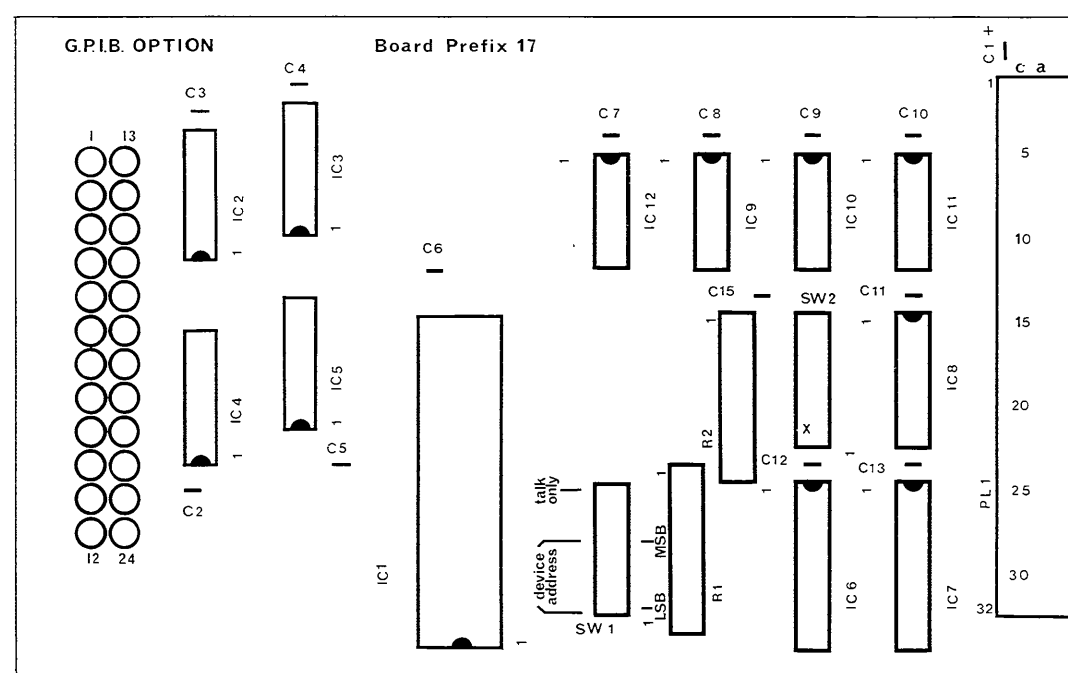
GPIB/Handler Interface Option - PCB Layout
